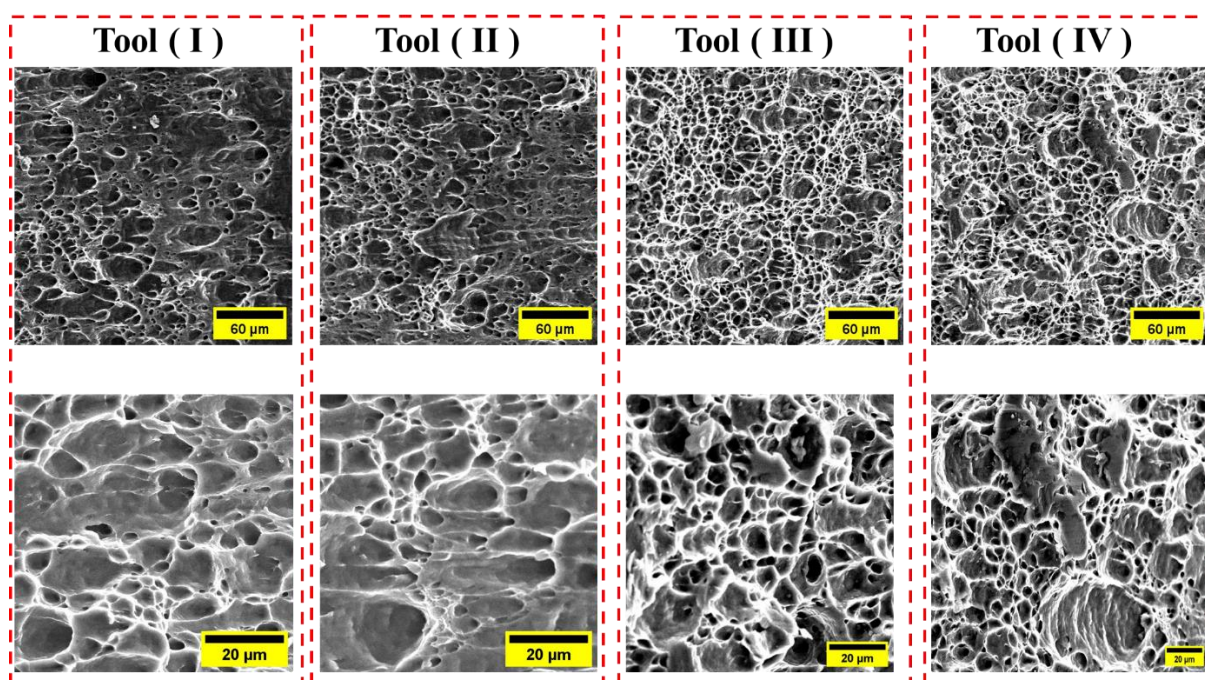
SEM image of Fracture surface of specimen by different tool ratio.
